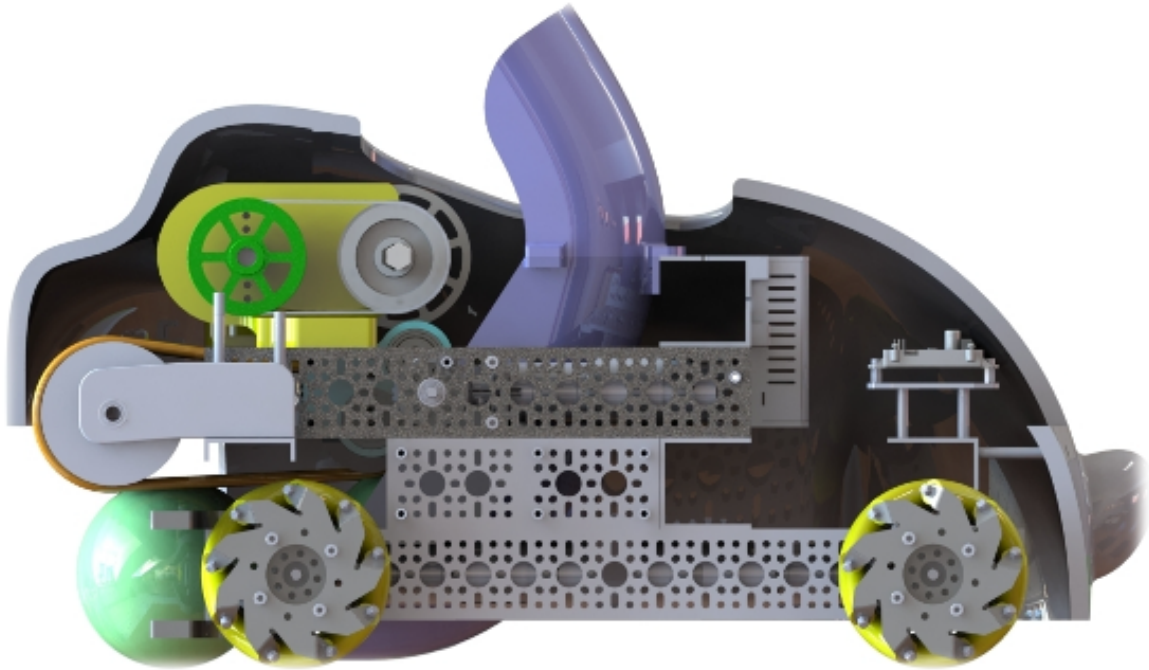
Side profile of MyJay's intake, elevator and flywheel mechanisms
